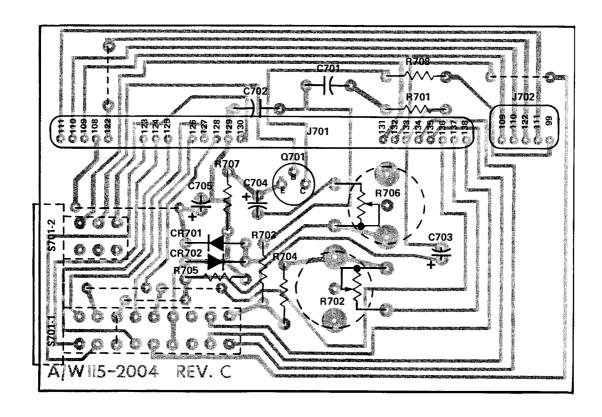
Tone Oscillator - Dolby Meter Board, Circuit Side
